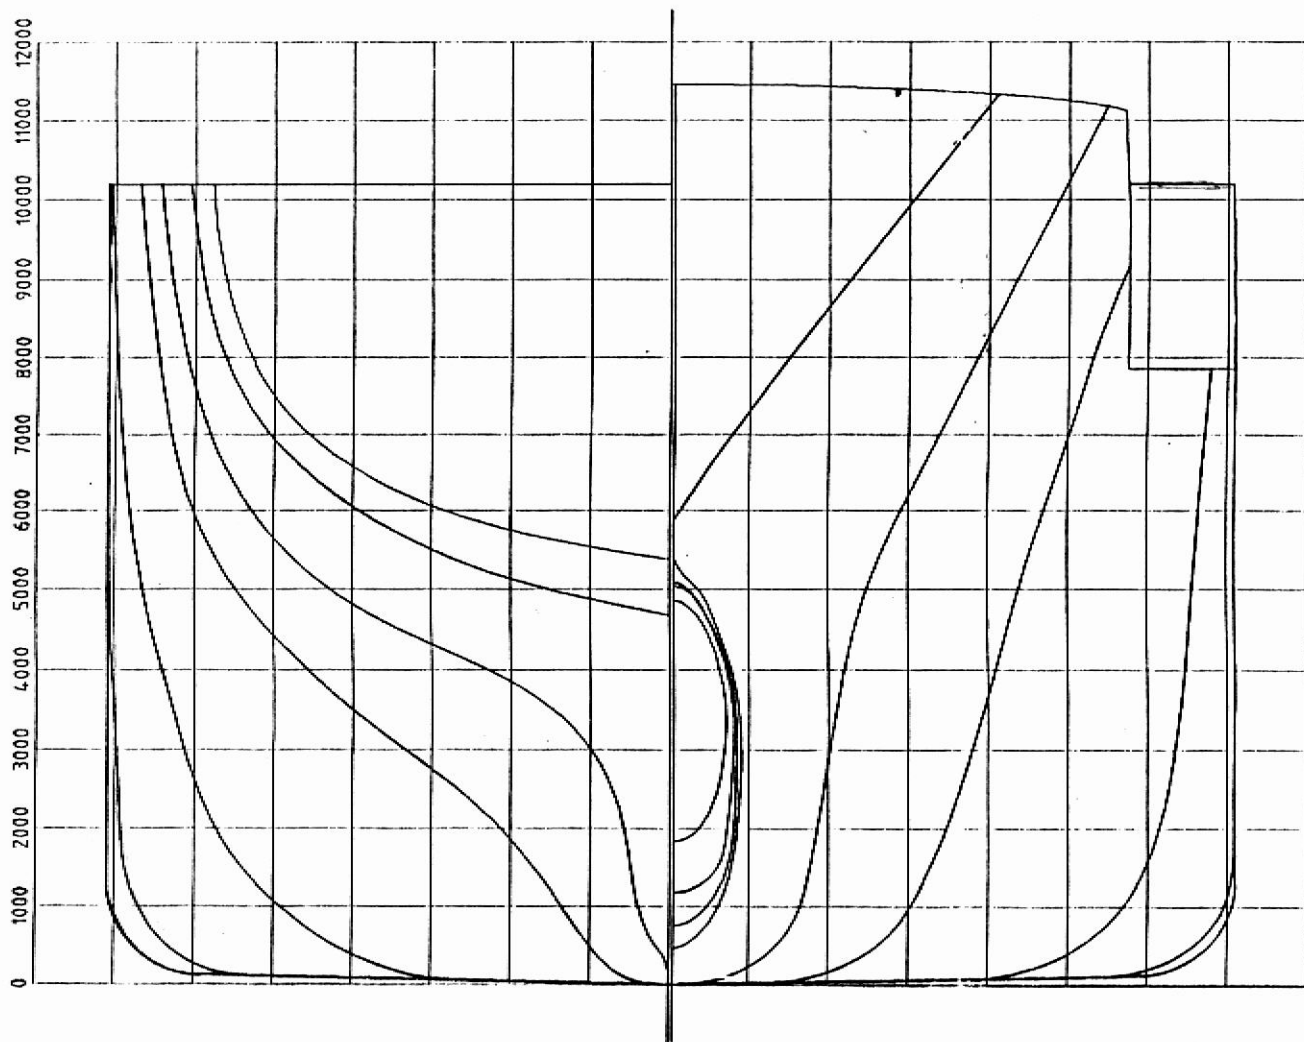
Body Plan (YZ plane section lines - Scale : 1/100)
